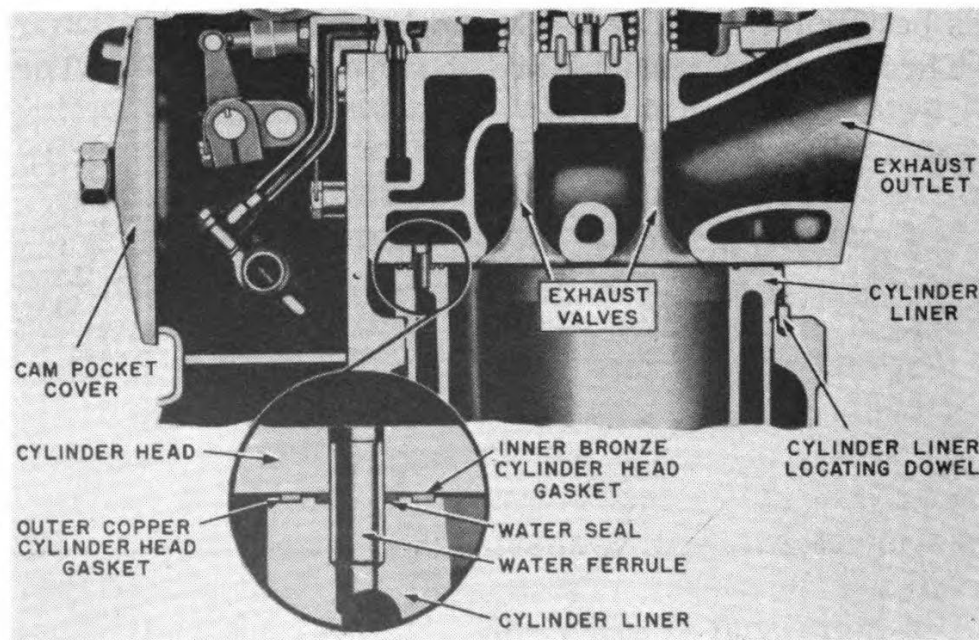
Combination gasket seal for a cylinder head (GM 268A).
